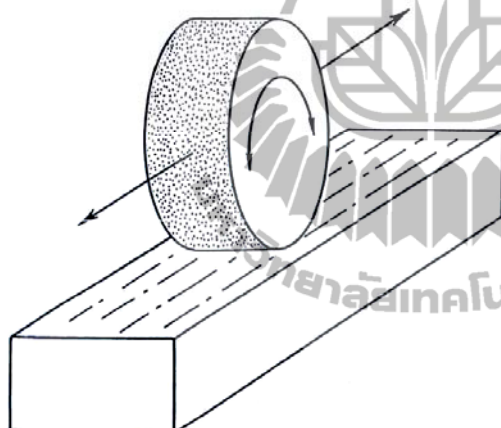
Surface Grinding Parallel to the Specimen Longitudinal Axis
